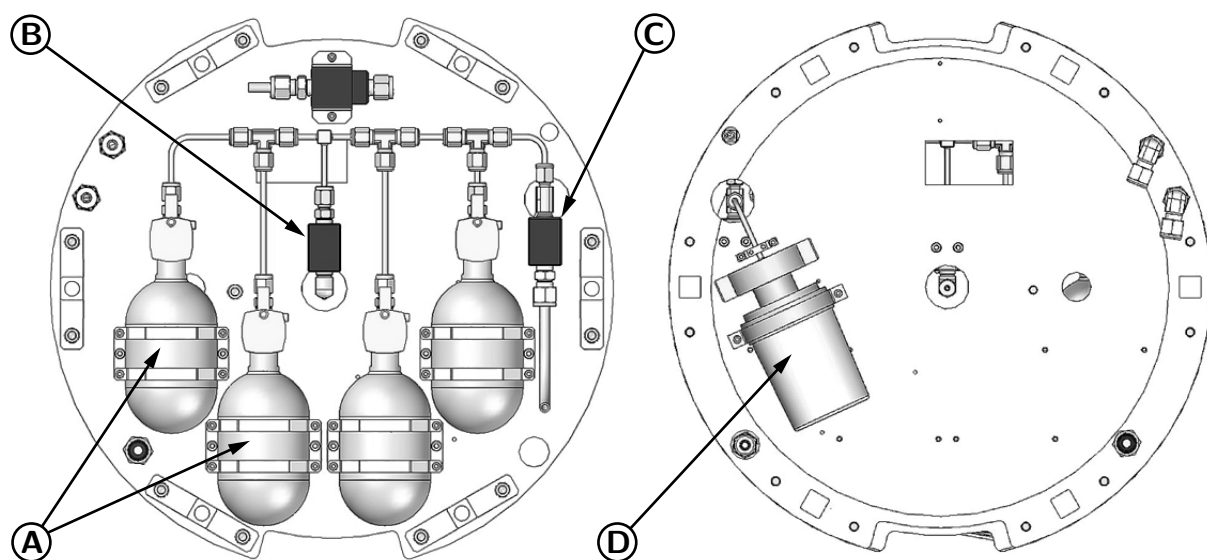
Exhaust Gas Sampling Platform. Left: top view, right: bottom view [196, 197, 293, 294, 296]. A: sample cylinders, B: solenoid vacuum valve for connection to combustion chamber, C: solenoid vacuum valve for connection to evacuation line, D: vacuum gauge.
